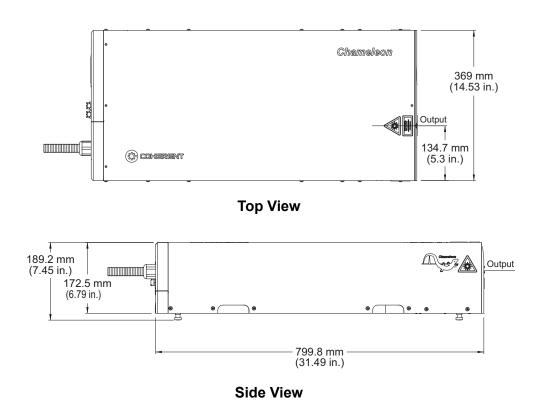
Chameleon Vision-S Laser Component Dimensions
